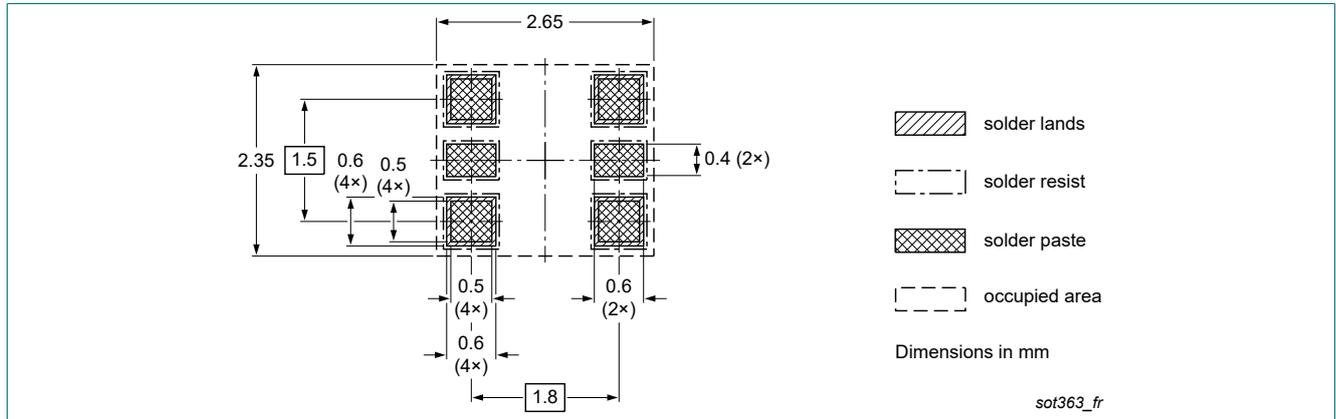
Reflow soldering footprint for TSSOP6 (SOT363)
